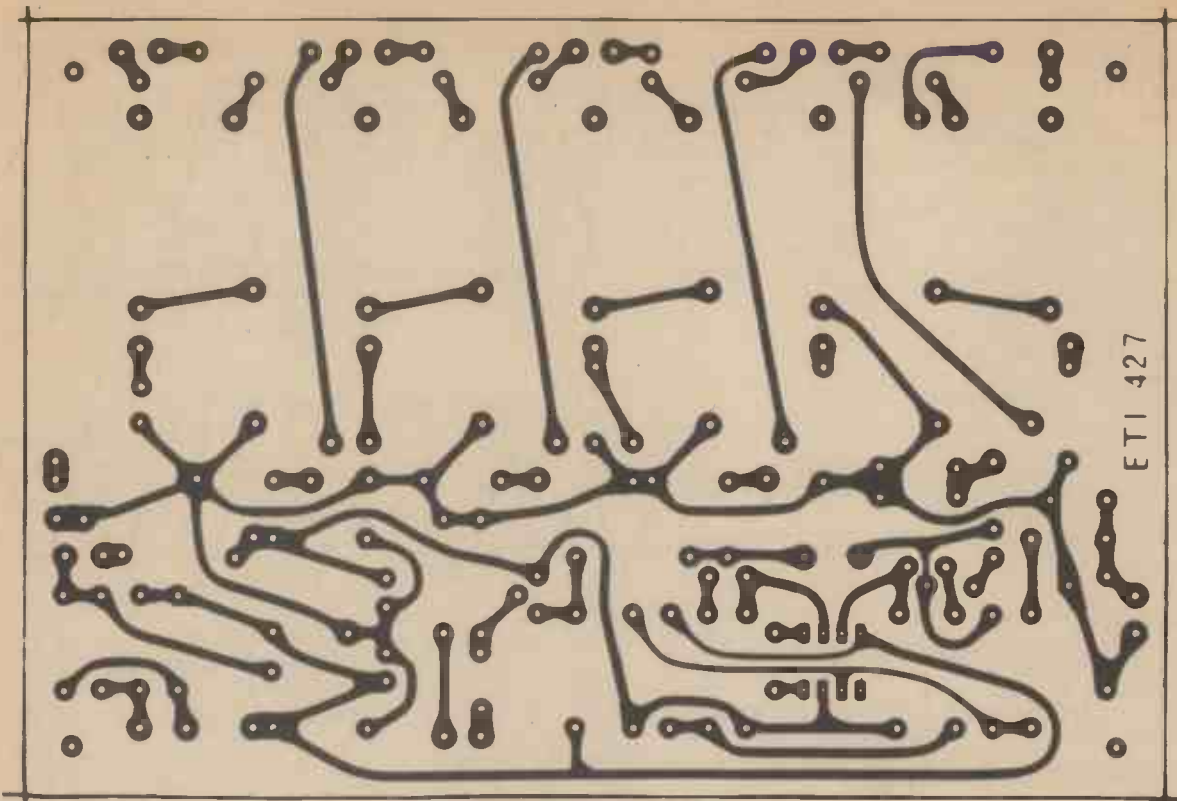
Printed circuit board for the equalizer. Full size 152 x 103 mm.
